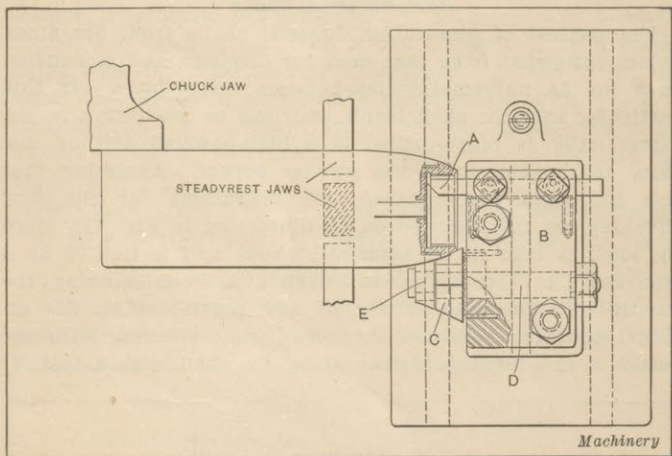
Tools for machining Brass Fuse Socket on 14-inch Heavy Turning Lathe—Eighth Operation
